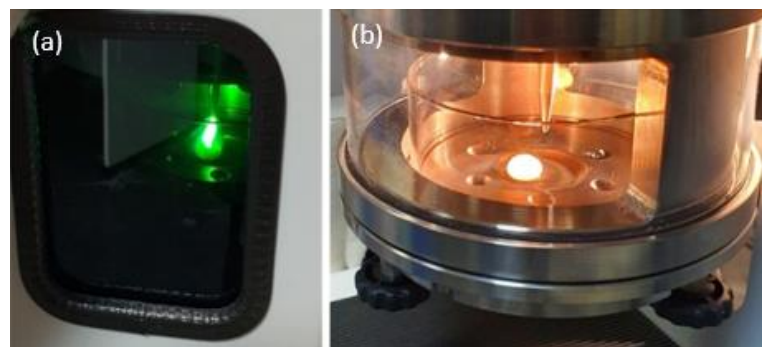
Ingot casting: (a) elements casting in arc melting machine, (b) the initial ingot upon finishing melting.
